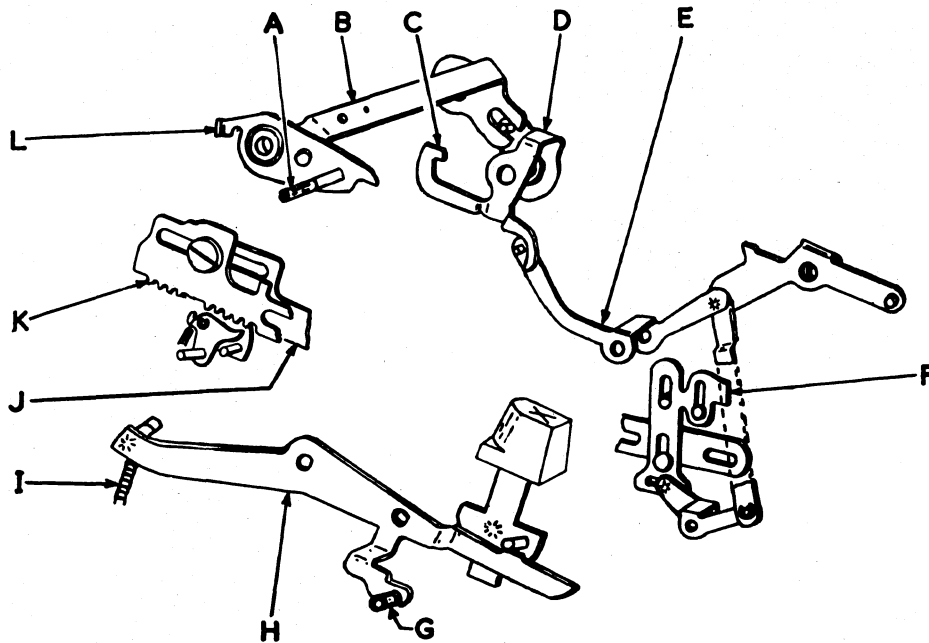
Subtract Indexing and Symbol Printing Mechanism
